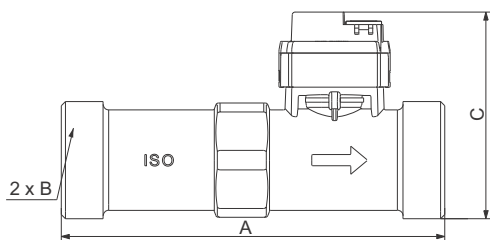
Dimensions, VFS QT, 10-200 l/min, with threads
